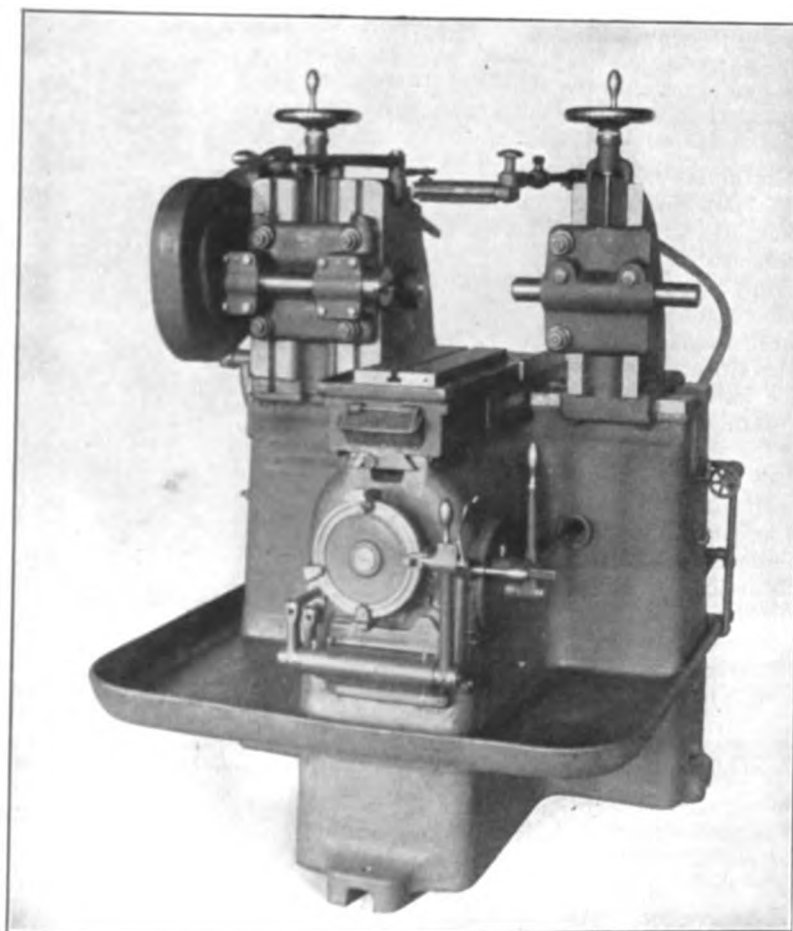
FRONT VIEW OF AUTOMATIC MILLING MACHINE WITH RECEDING TABLE
